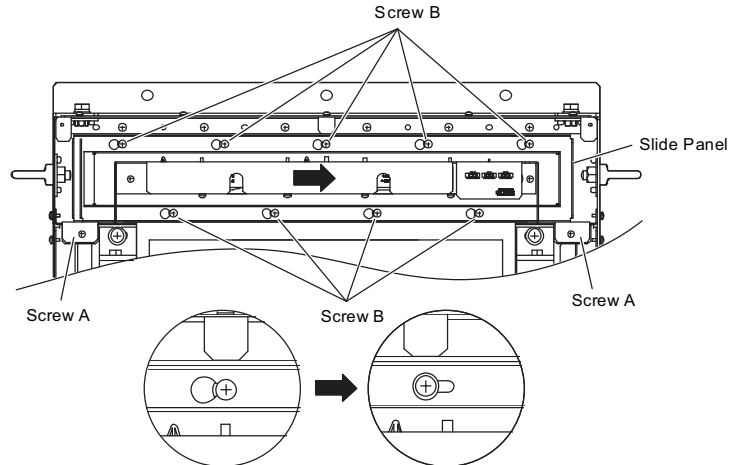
Removing the Fan Unit: 4A0515 and 4A0675
